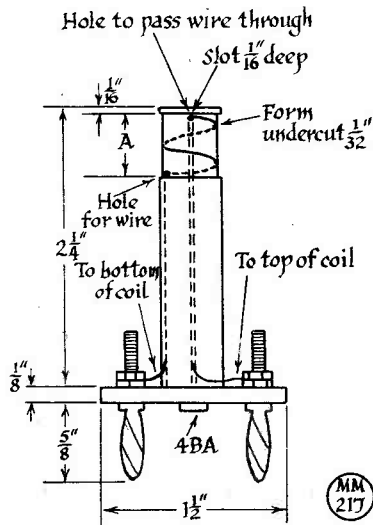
Dimensions of the coil former used by G2AO Winding specifications are given in the table.
